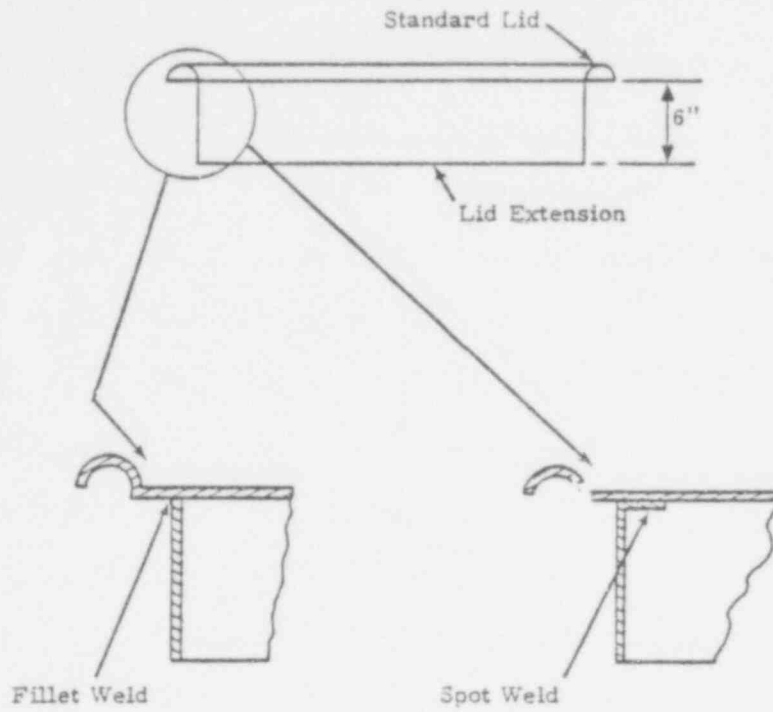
Attachment of 6-Inch Extension to Standard Lid
